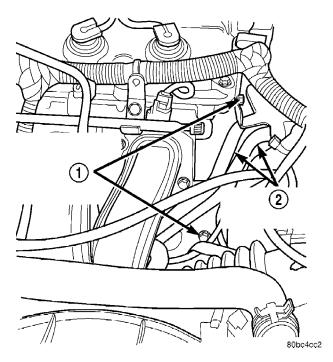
HEATER CORE COOLANT SUPPLY LINES
